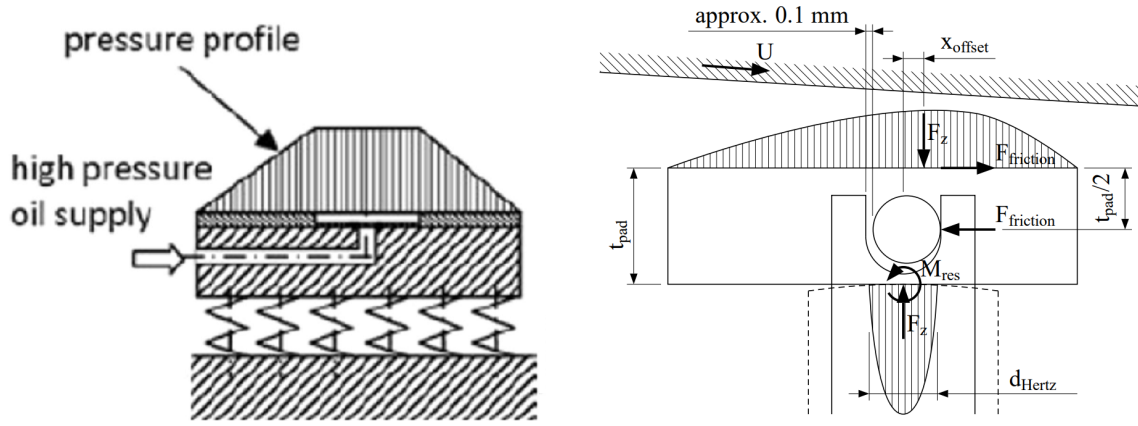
Schematic drawing of tilting pad bearings and accompanying pressure distributions
